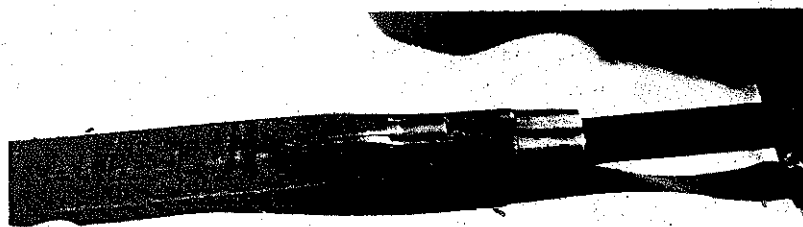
Frank machined the ramrod entry pipe for the Masters' gun in his shop, and then set it off with two simple lines he carved into the stock.
